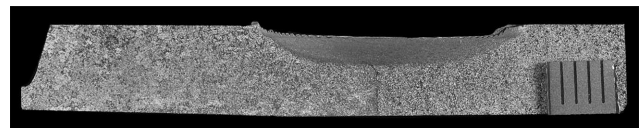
FSW weld structure. Welding parameters: no. 4 of Table. 2
